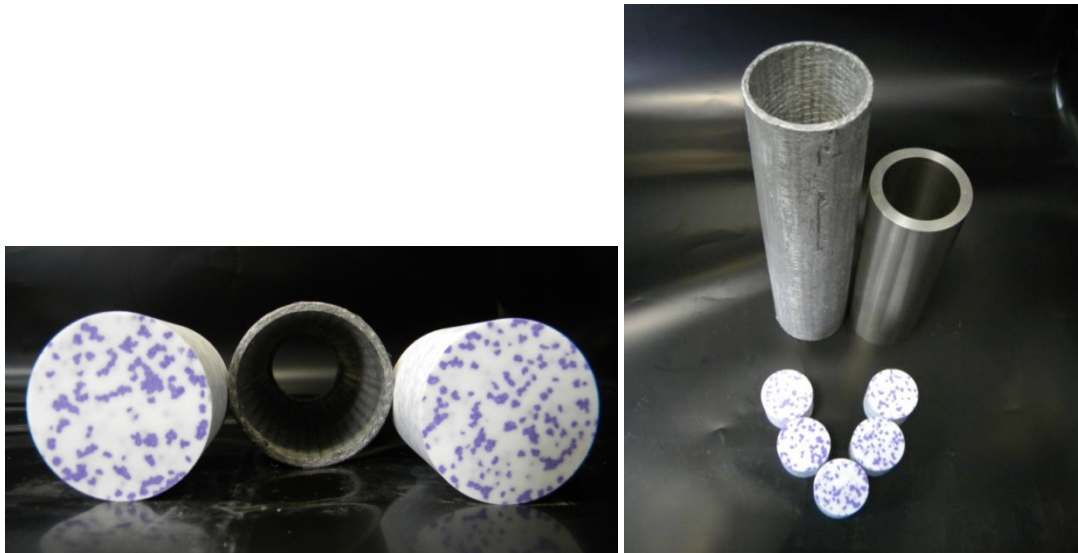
Machined LX-14 explosive pellets with RMS and steel casings.
